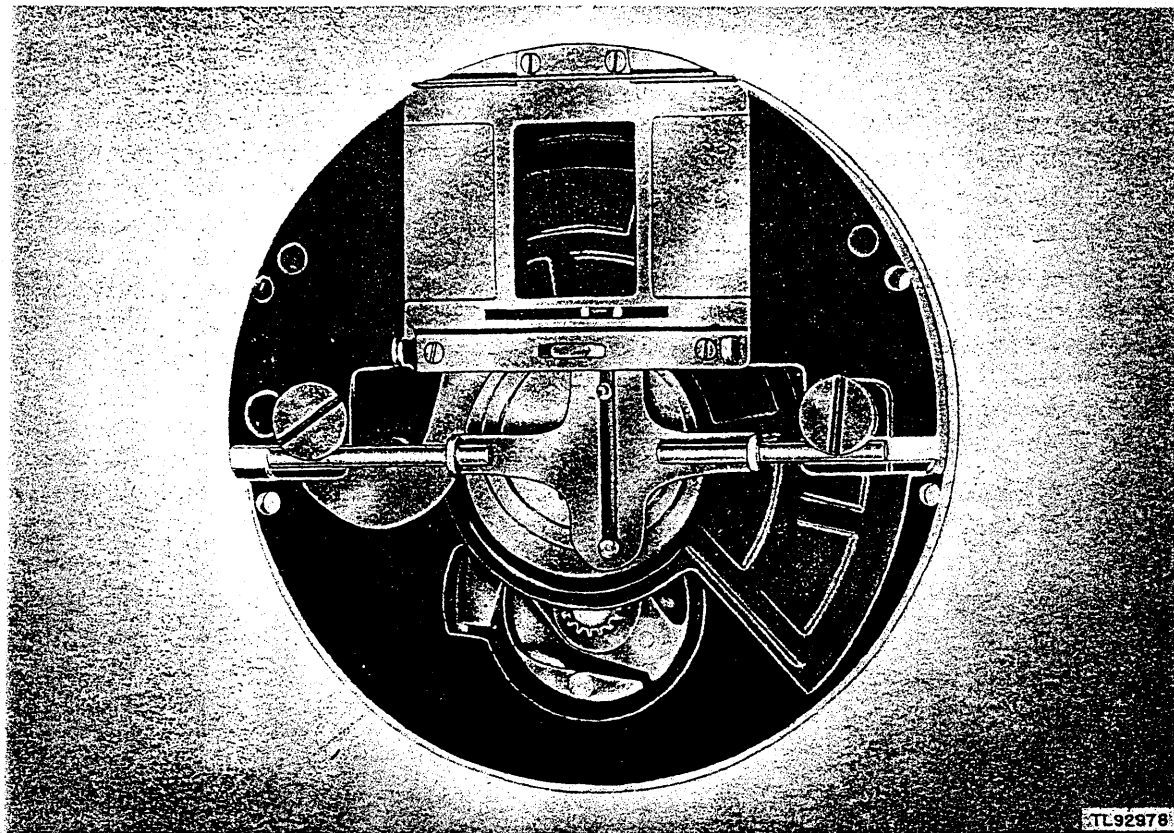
Assembly, camera head, Camera PH-330-A (governor-in-the-head).
